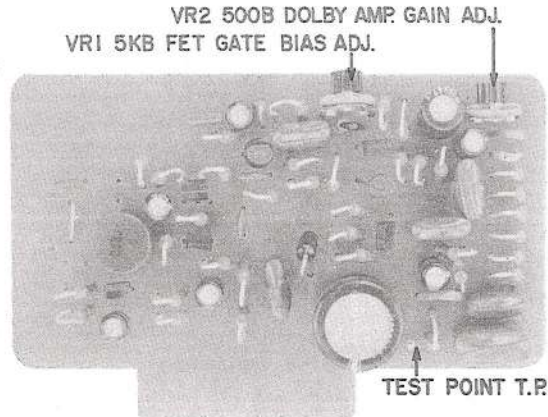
P.B. DOLBY AMP. P.C. BOARD (FACE SIDE)
